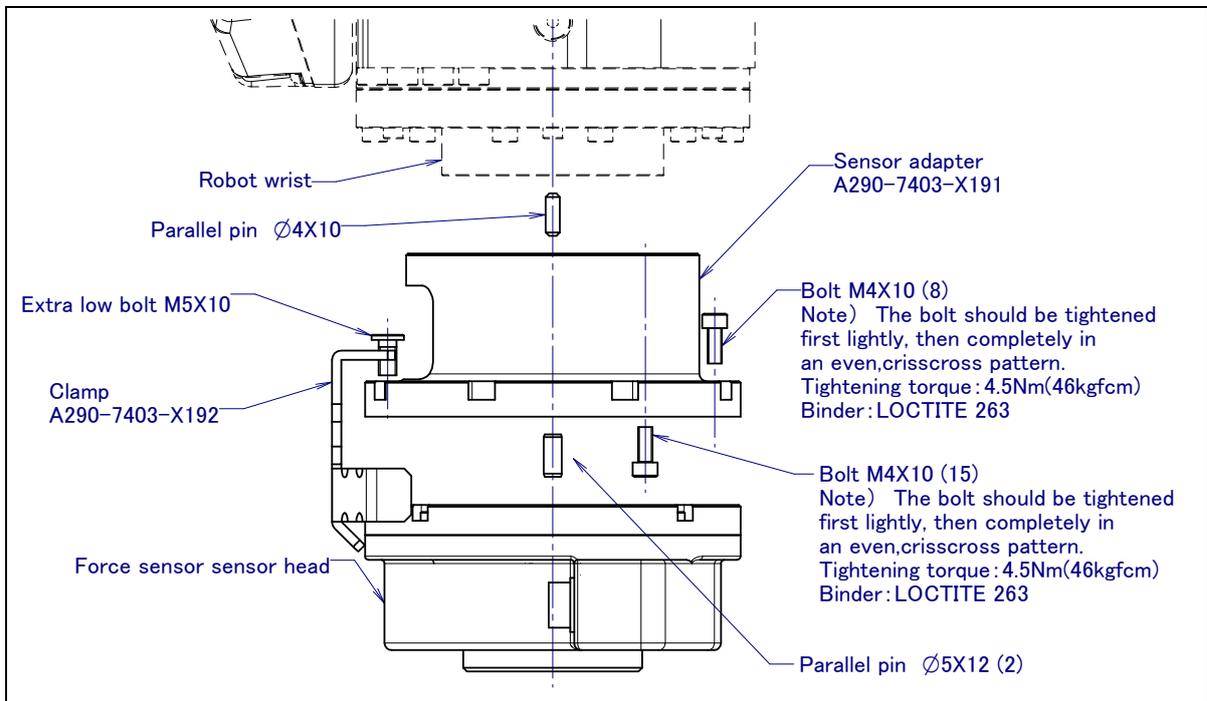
(c) Replacing the force sensor, sensor head and adapter (FS-40iA)
